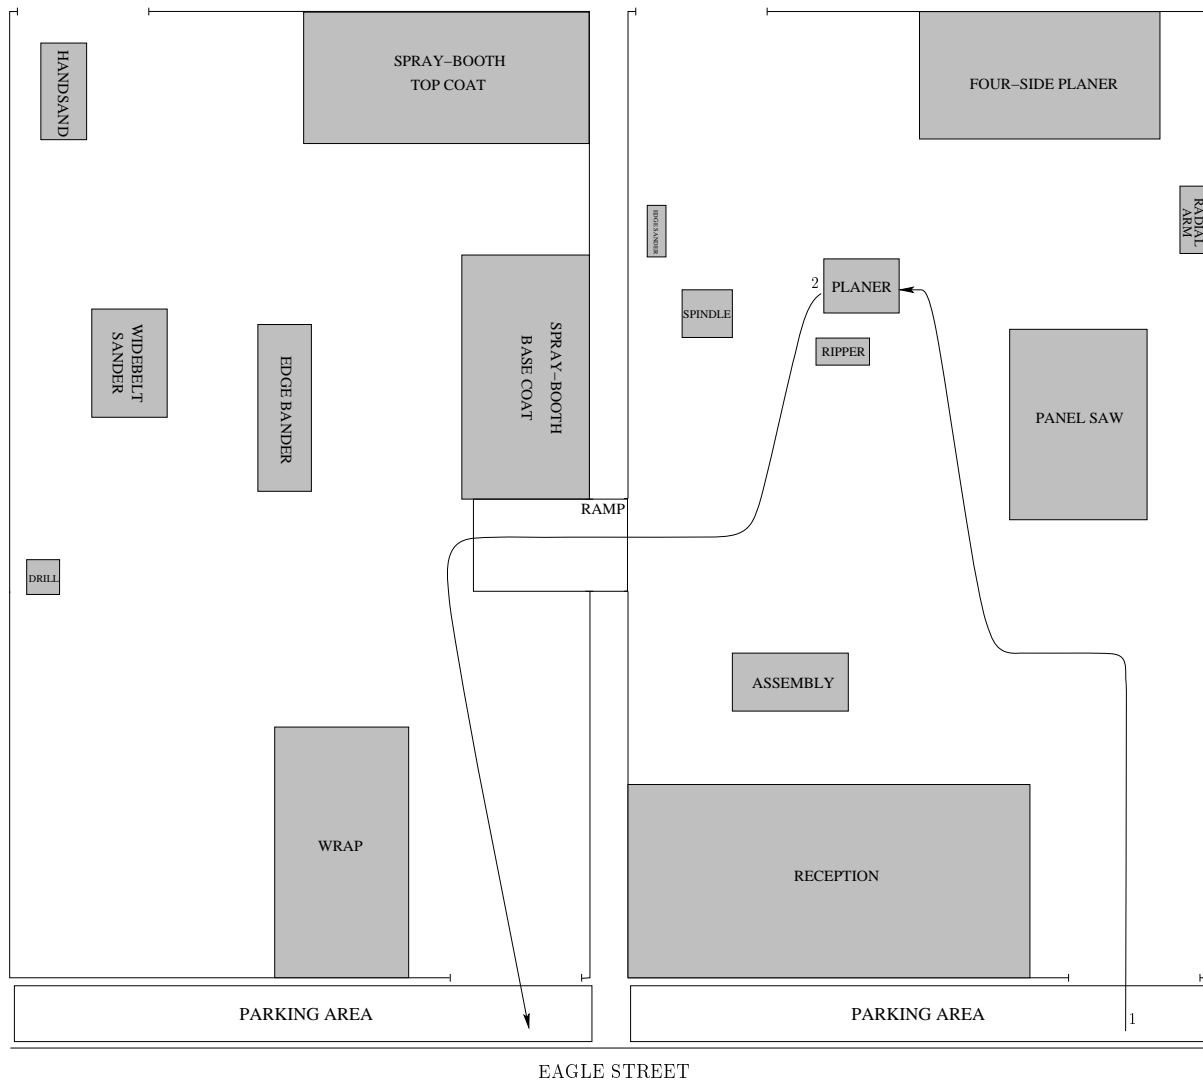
The processing sequence of the contract planing all round of solid wooden logs, shown on the factory floor layout of LWC.
